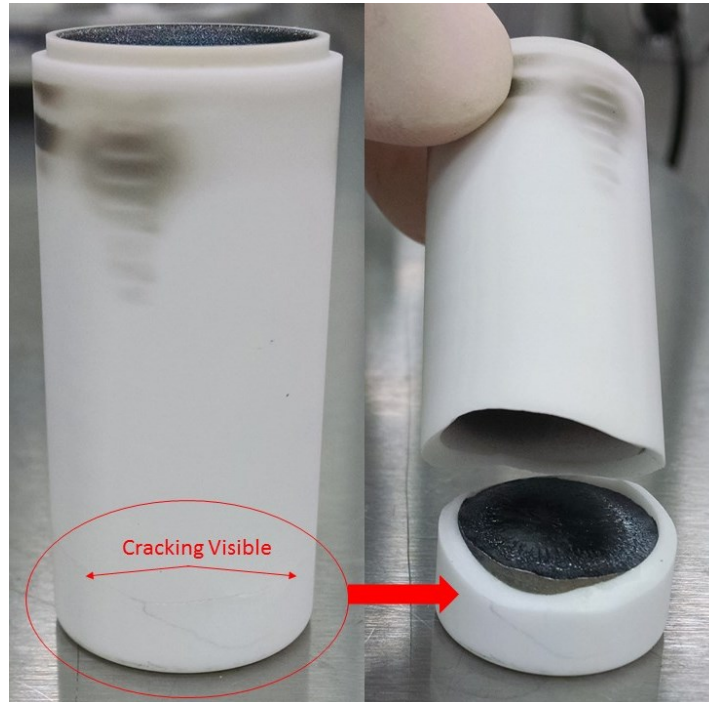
If molten metal wets the entire bottom of the alumina crucible it will likely crack during cooldown.
